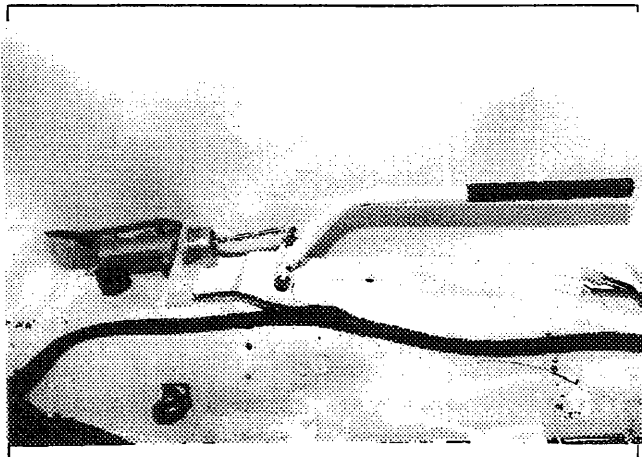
ALTERNATIVE HYDRAULIC HANDBRAKE
